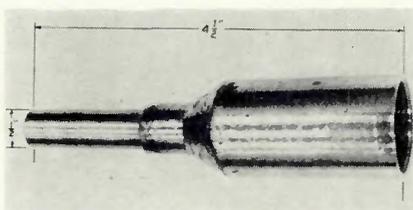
Modified torch barrel for "mini-joint" welding
